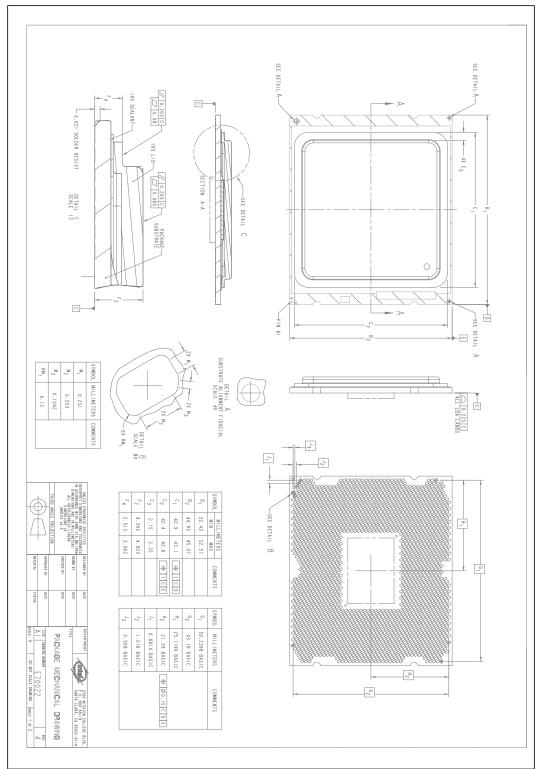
Processor Package Drawing (Sheet 1 of 2)
